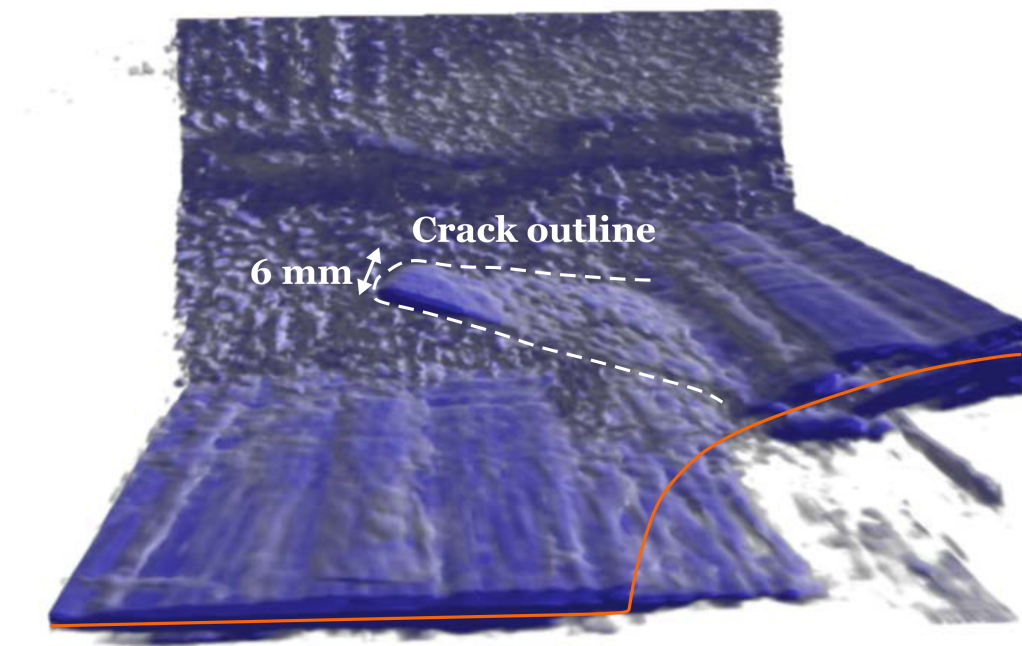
3D ultrasonic inspection of crack in weld clad fluid end - Potential to obtain a full volumetric image of the component to locate weld defects or cracks. Figure courtesy of the Centre for Ultrasonic Engineering, within the department of Electronic & Electrical Engineering at the University of Strathclyde.
